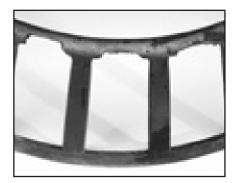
Heavy wear in the small end of the cage pockets is typical of excessive endplay.
